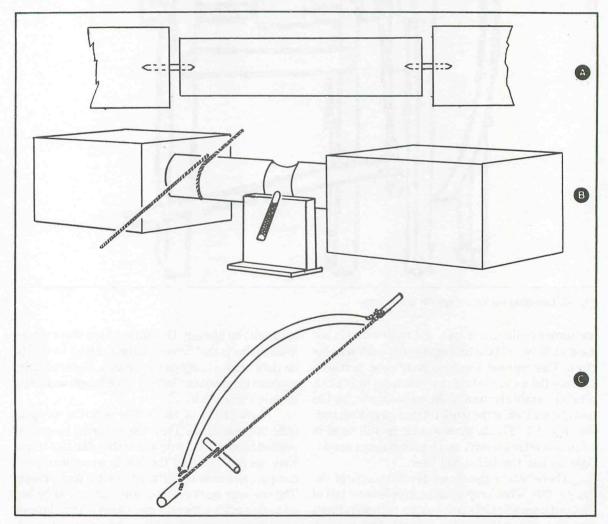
The bow lathe. (A) Work crudely suspended between centers. (B) Cord on workpiece, primitive tool in position. (C) Bow with cord on workpiece.
